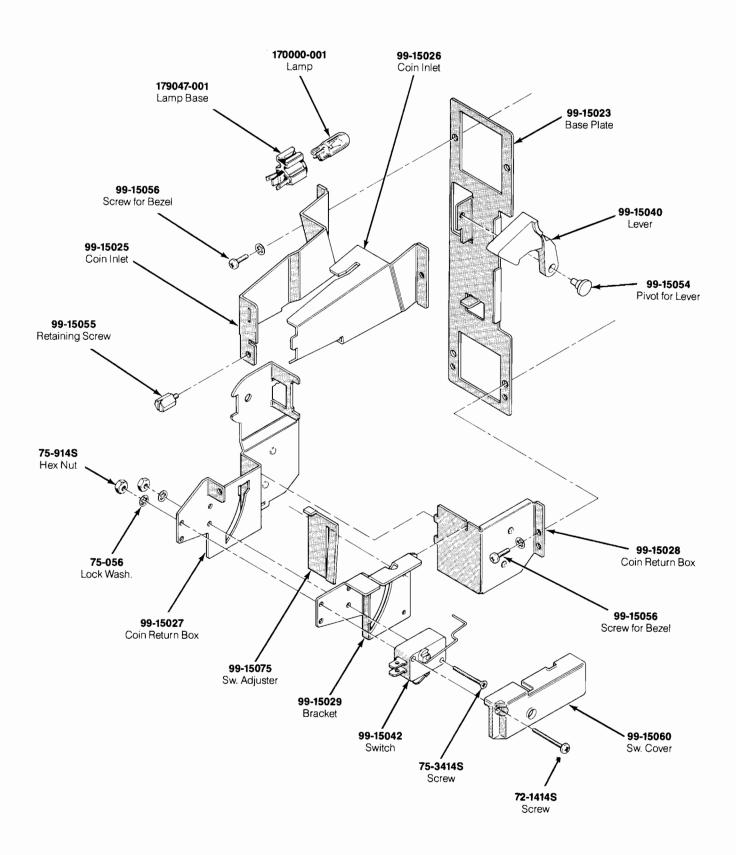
Coin Controls, Inc. Coin Door Assembly 171034-xxx A
